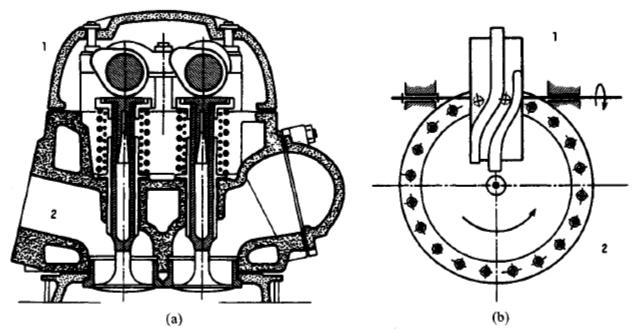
(a) Planar cam mechanism of the internal-combustion-engine D-R-D-R type; (b) spatial cam mechanism of the 16-mm film projector R-D-R type.
